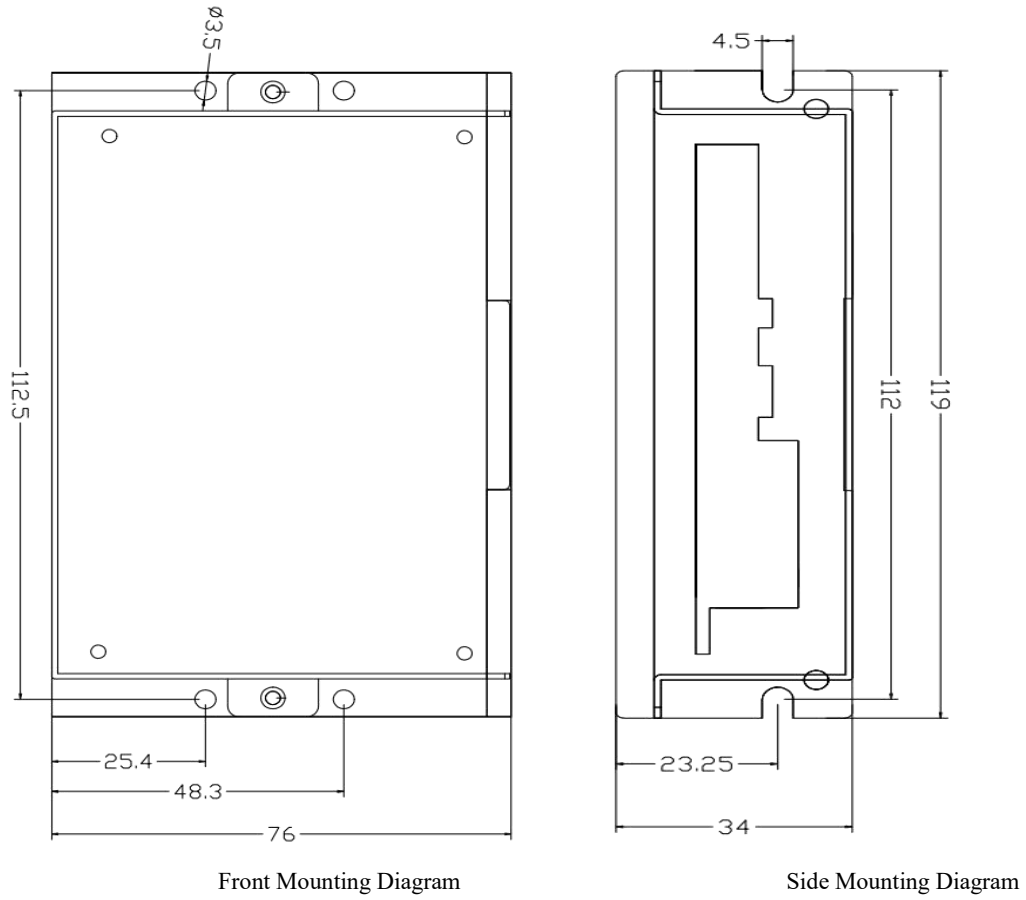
Installation Dimension Drawing (Unit: mm)
